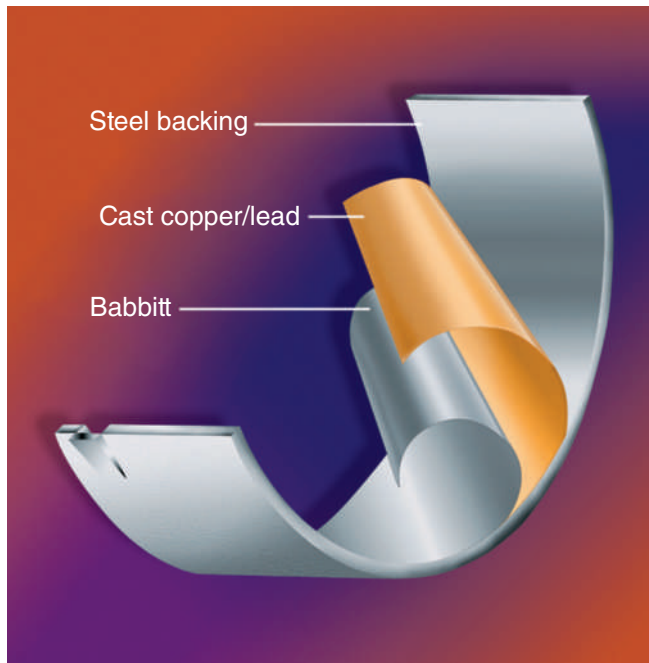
The basic construction of a bearing composed of three metals.
